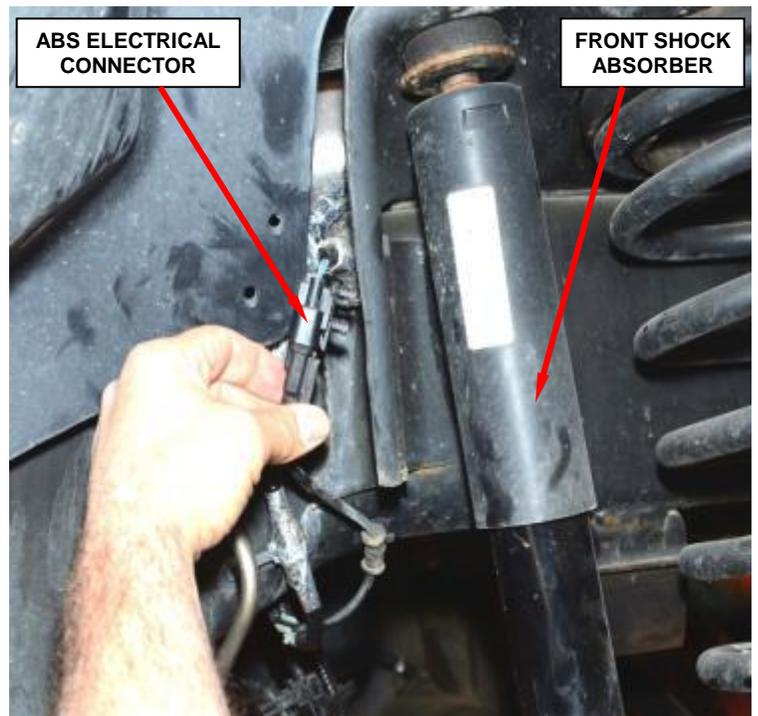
ABS Wheel Speed Sensor Electrical Connector
